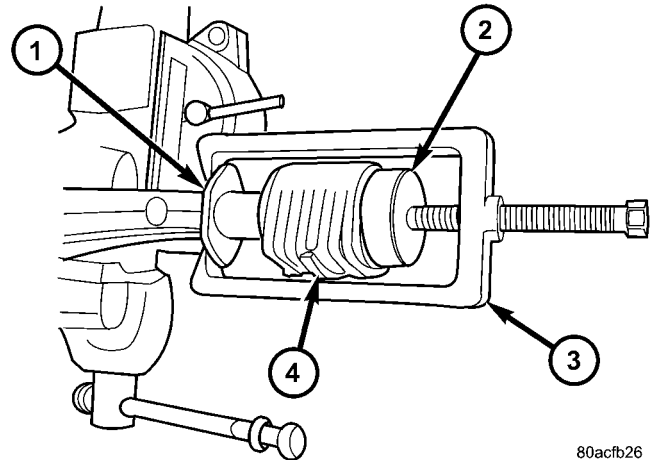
BUSHING MASTER SPLINE LINED UP WITH GROOVE (RIGHT SIDE SHOWN)
